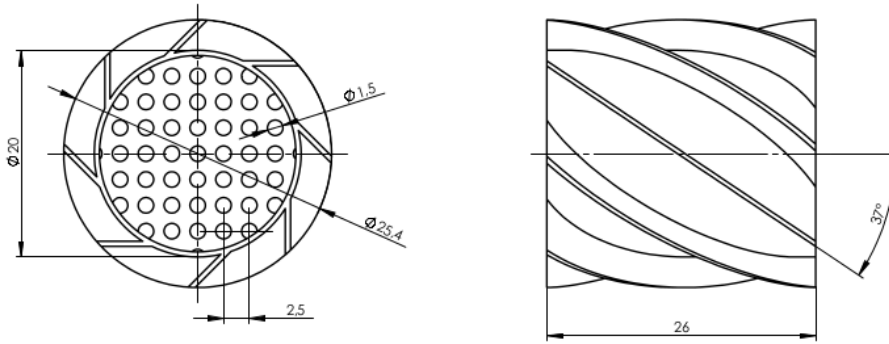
Technical drawing of 1 in diameter swirler and primary dimensions (in mm).
